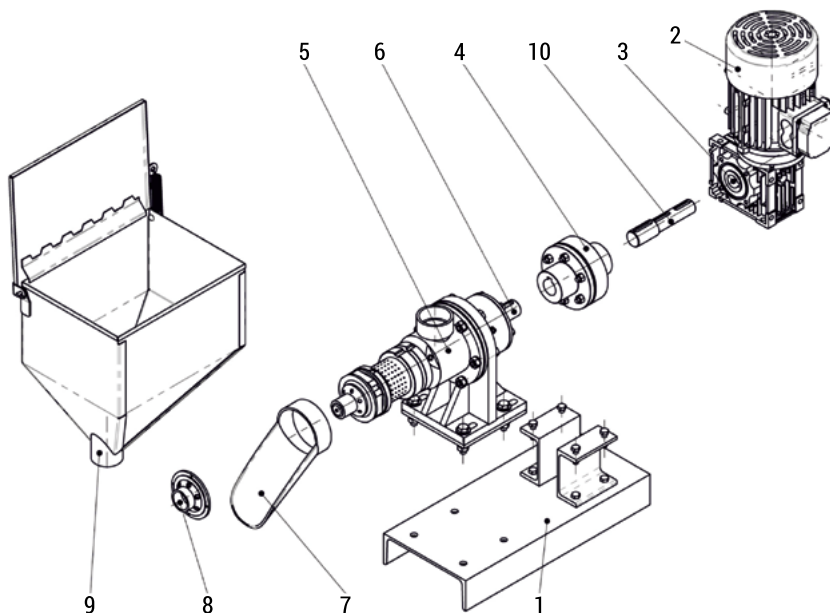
General design of the developed screw-type press (in the disassembled state)
